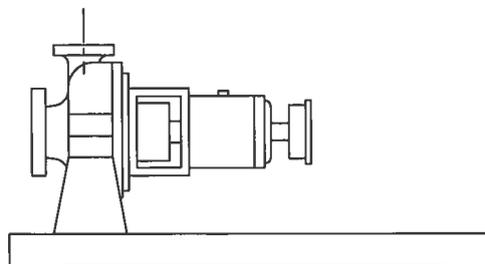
Pump type OH2: Horizontal, centerline mounted, single stage, overhung design
